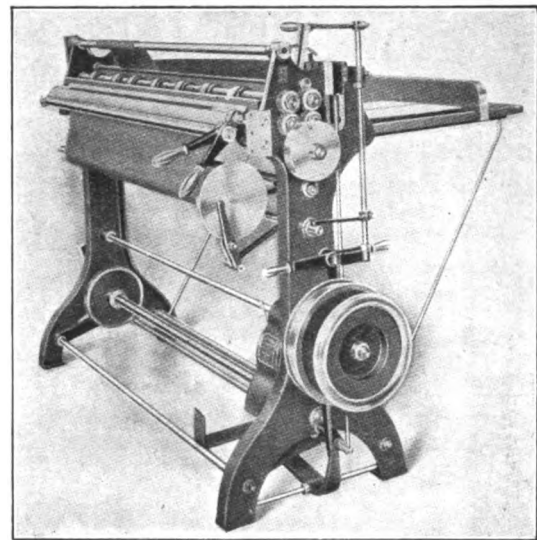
NO. 1 SMYTH CLOTH-CUTTING MACHINE
